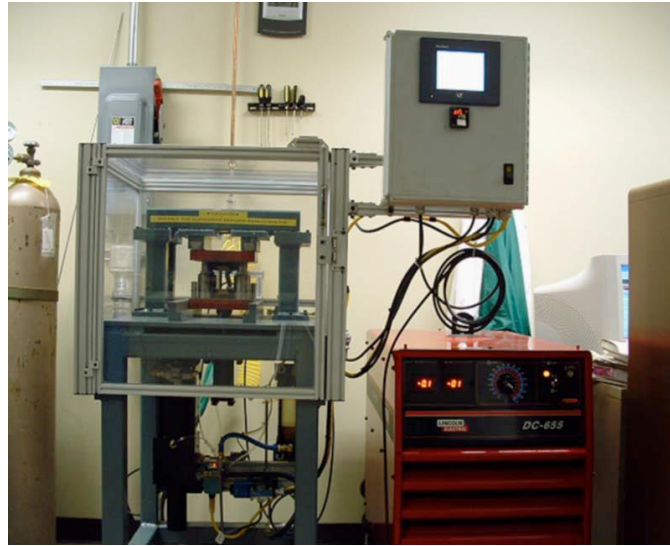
Assembled apparatus for Reaction Resistance Welding (RRW) of refractory materials [55].
